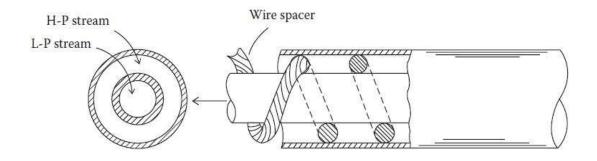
Concentric-tube heat exchanger with wire spacer
